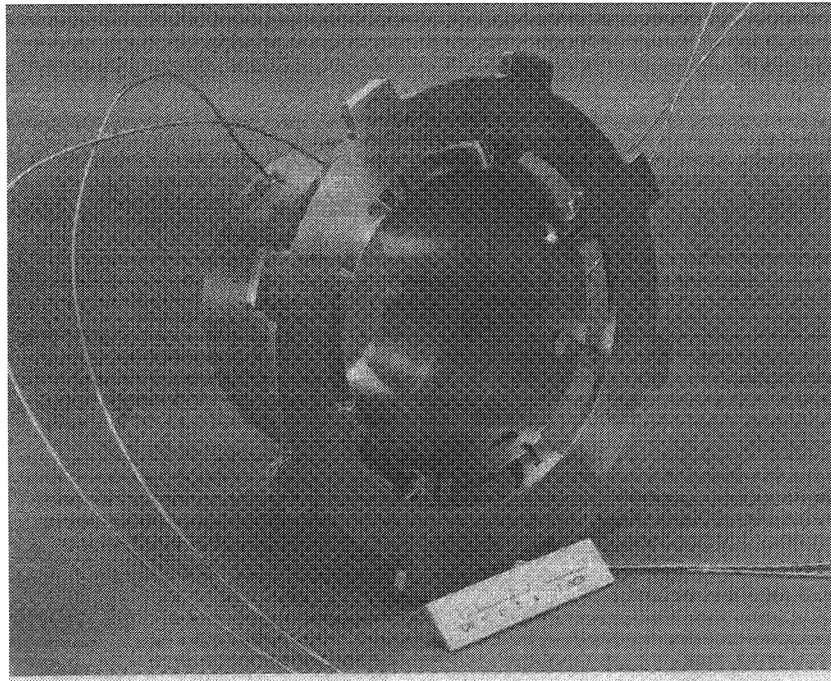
Smooth Wall Rich Zone Liner Jacket.
